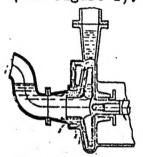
Self-priming pump 1- booster; 2- sleeve; 3impeller.
